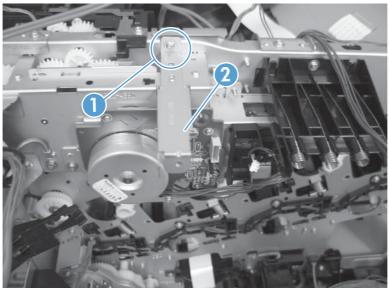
Remove the fuser drive assembly (2 of 6)
